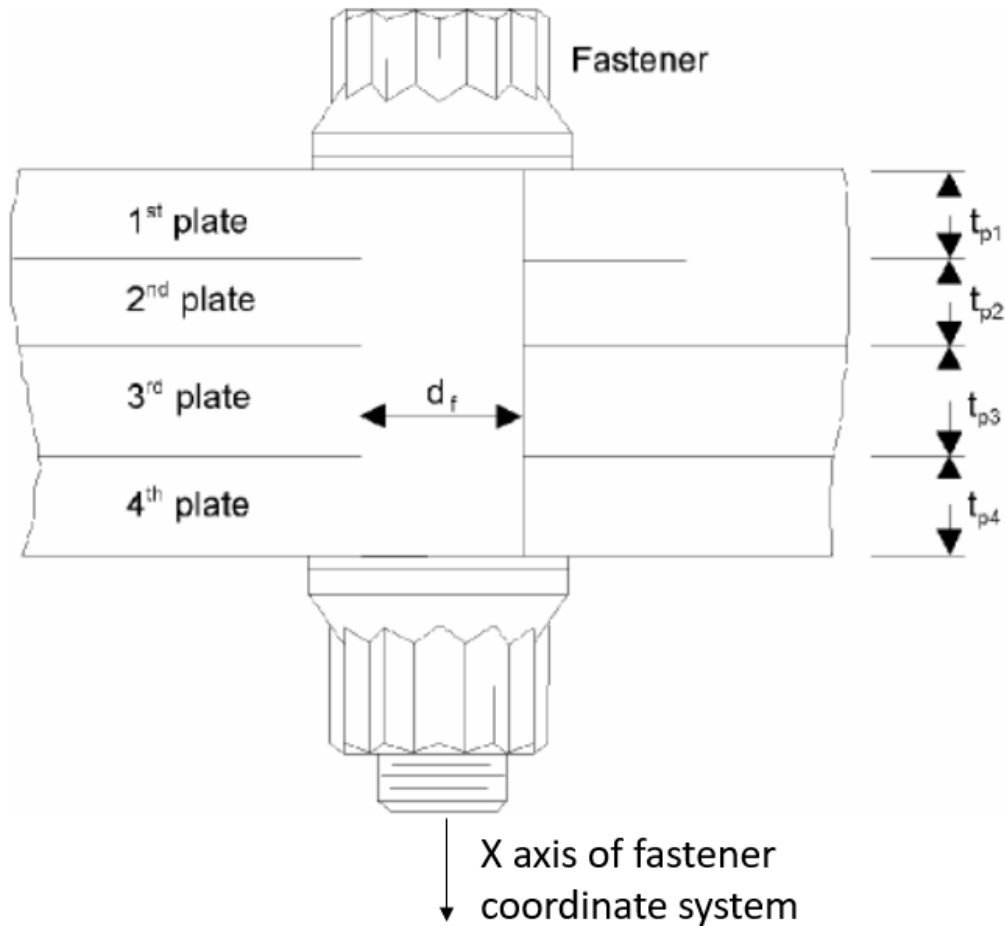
Fastener joint (Adaptation of Figure 1 of [Rutman, Viisoreanu e Parad \(2000\)](#))
